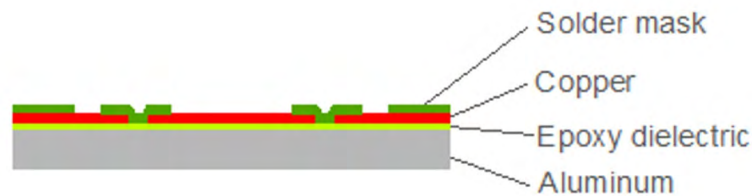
MCPCB typical cross section of the three-pad openings with aluminum substrate.
